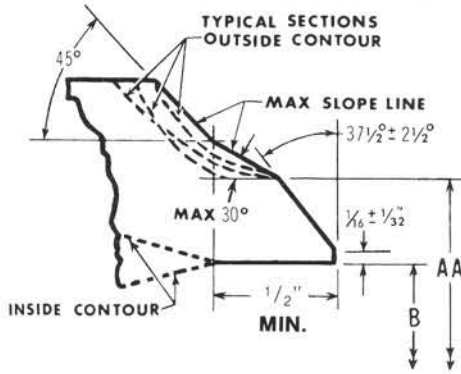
A.- Welding End for No Backing Ring or for Split Backing Ring. Pipe Wall Thickness "t" ⁷/₈ in and less.
